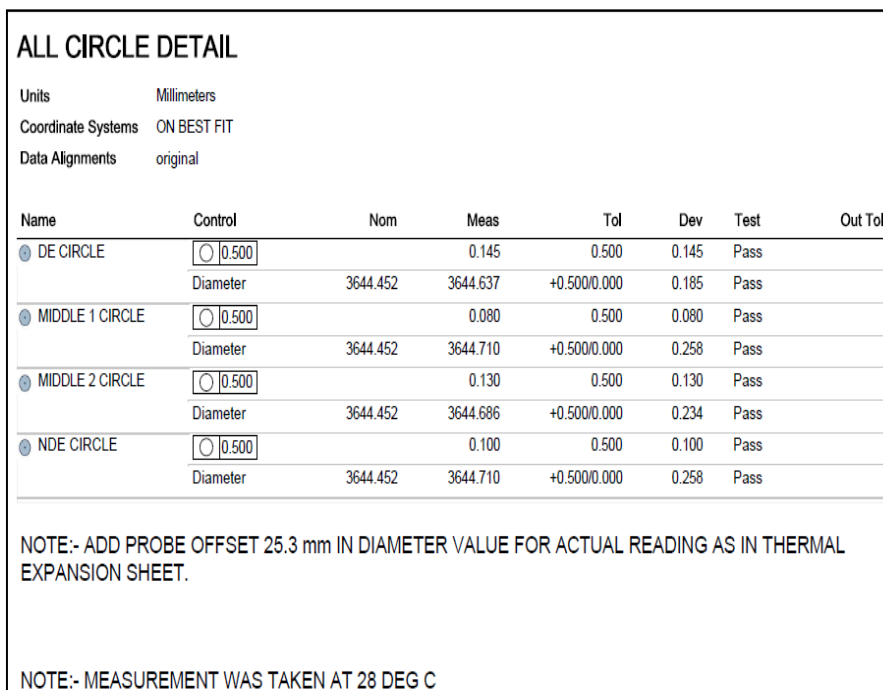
Stator bar inner diameter fixing dimensions at all circle readings
